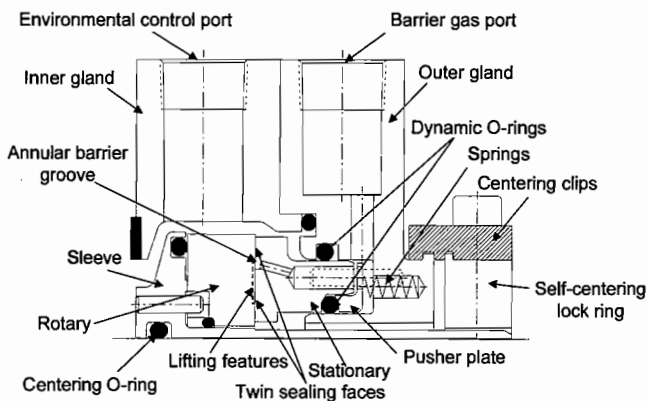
Configuration of Twin Hybrid Gas Barrier Seal.
